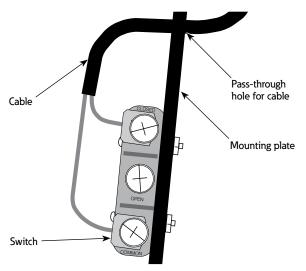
Switch SW2 mounted with cable routed through mounting plate.
